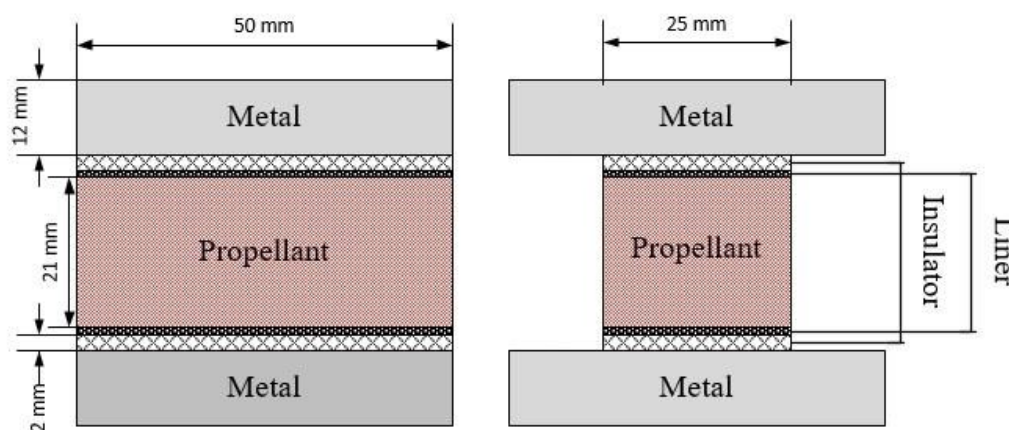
2D Sketch of MILP Tensile Test Specimen
